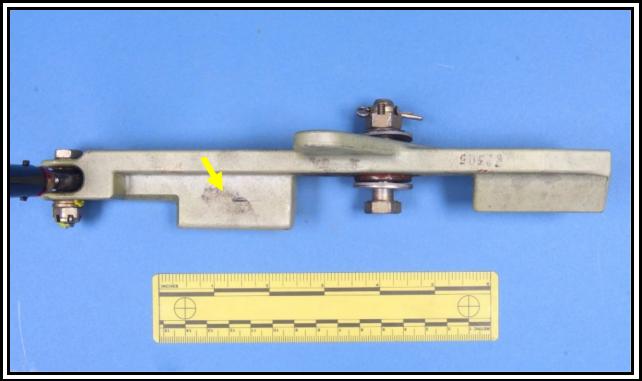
A photograph of the steering arm showing a witness mark consistent (yellow arrow) with it contacting engine mount plate.
